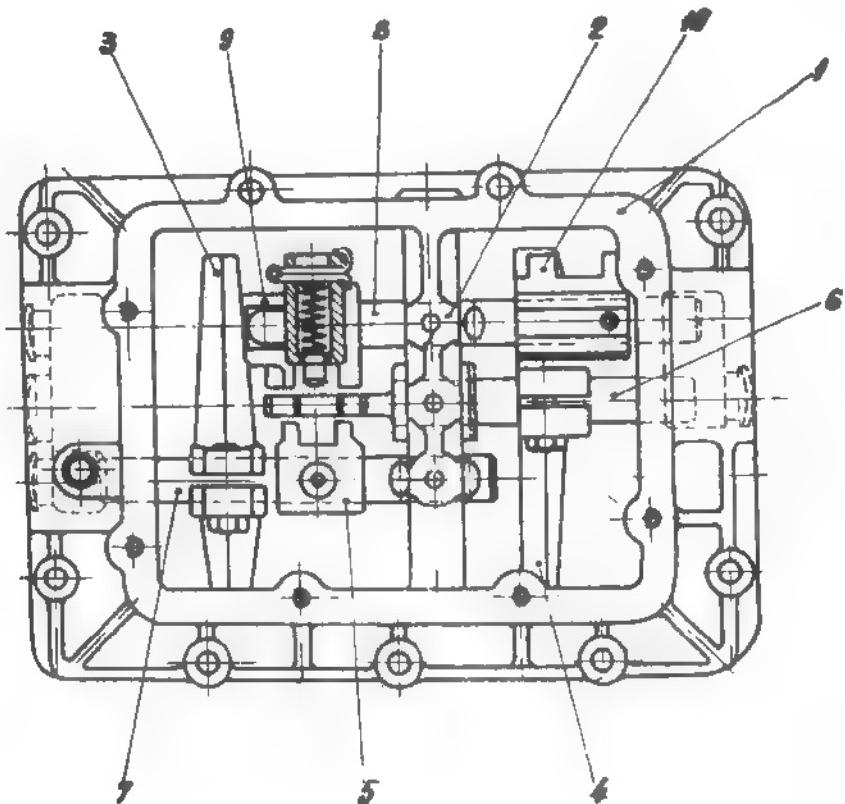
GEARBOX GEAR SHIFT COVER
